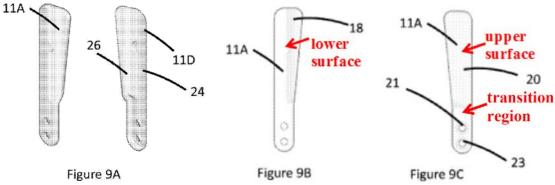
A is a perspective view of the lower surfaces of paddles 11A, 11D
